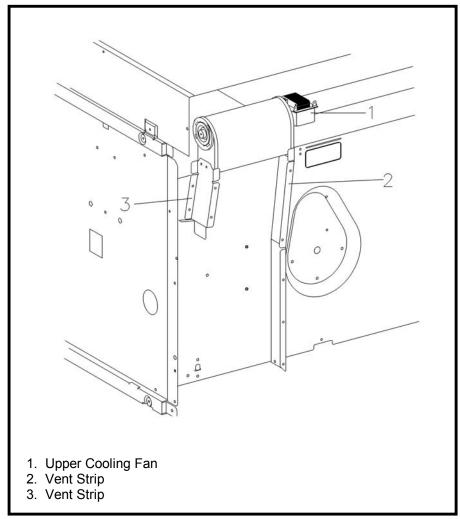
Upper (or Single Oven) Cooling Fan - Removal
